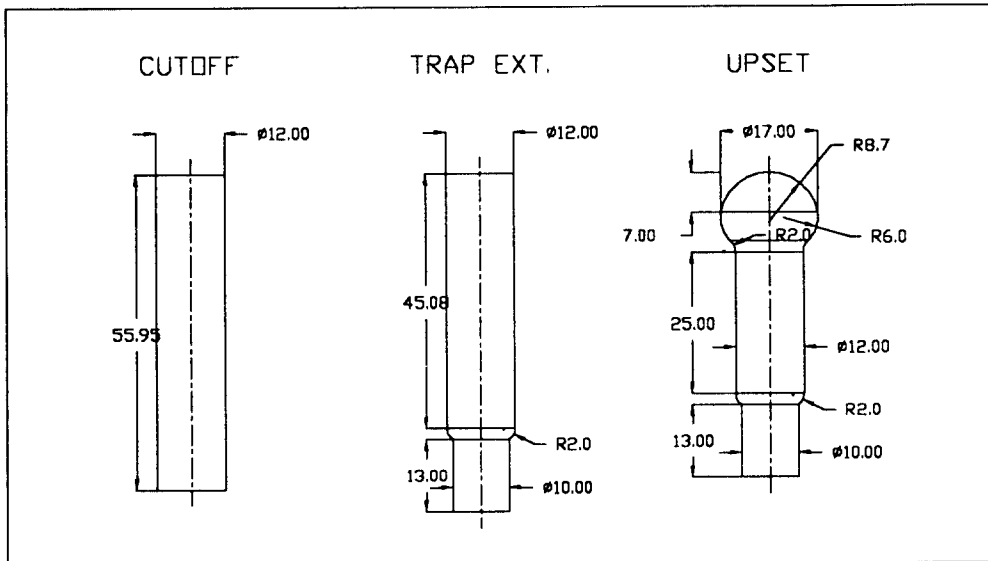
Output CAD drawing for designed process sequence for round head rivet(Material = AISI1010).
